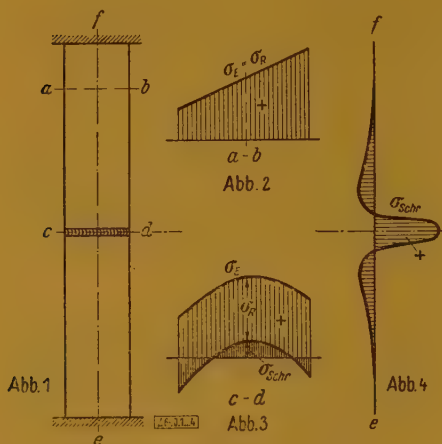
Plate built in at both ends.  $a-b$  = section parallel to the joint  $c-d$ ;  $e-f$  = section through the middle.
